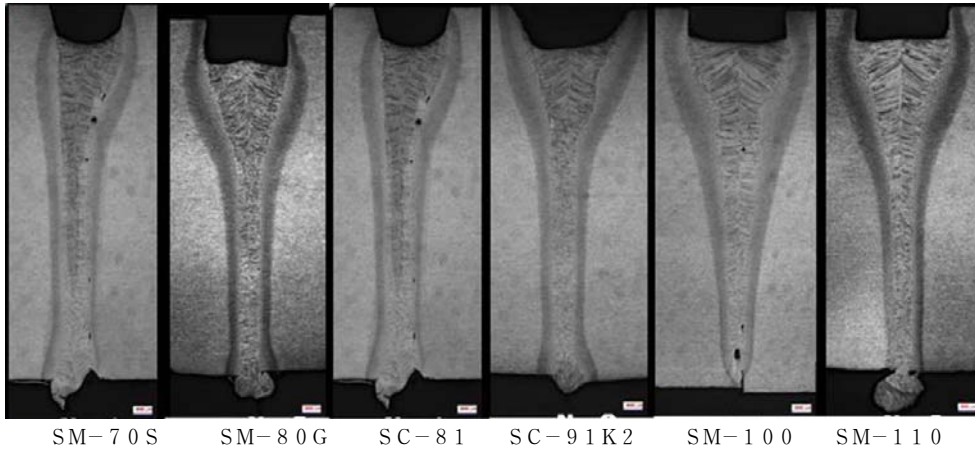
Cross section of laser-arc hybrid welds
